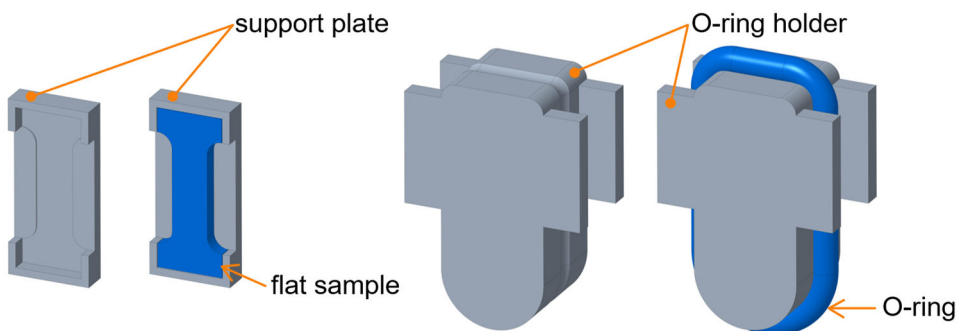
Support plate for flat samples (left) and O-ring holder for O-rings (right)
